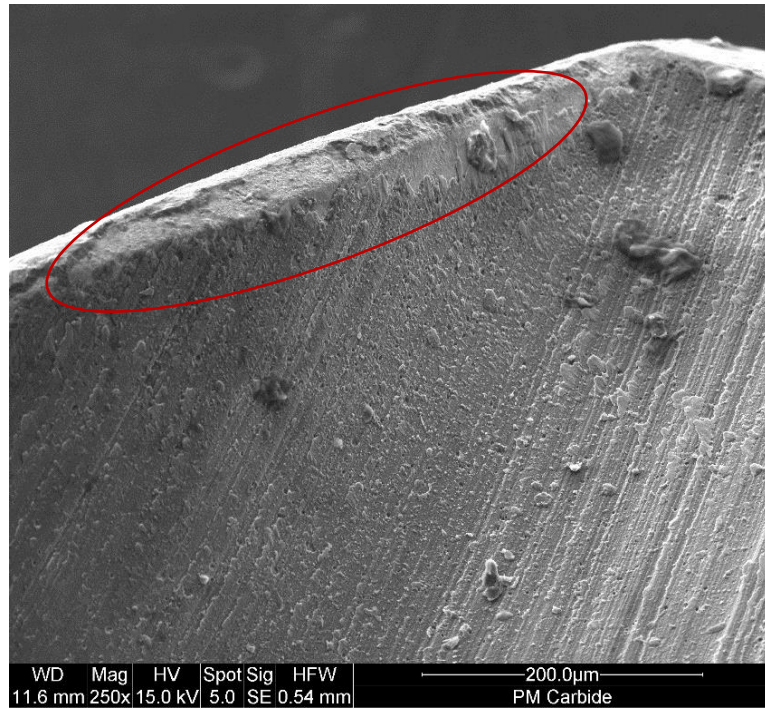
250x SEM flute view of the cutting edge of the carbide drill bit after drilling 60 holes in PM titanium.
